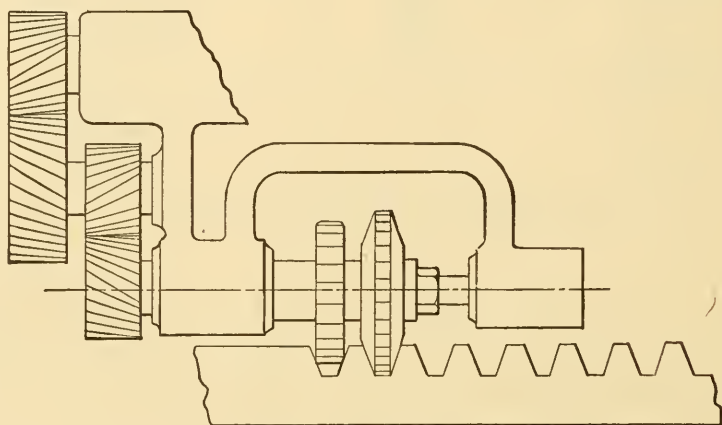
HELICAL GEARS FOR CUTTER DRIVE.
